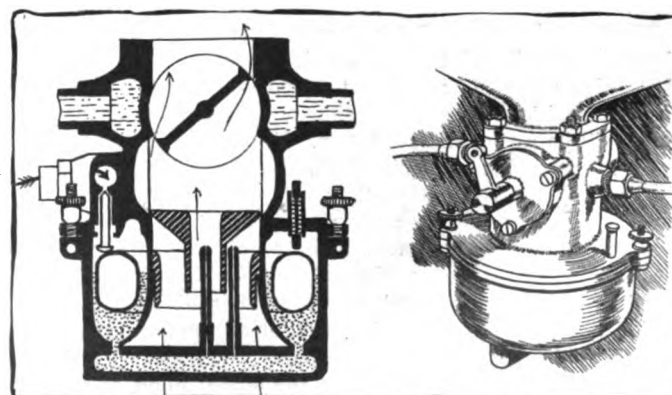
Sectional and exterior views of the 1913 Deasy carbureter
